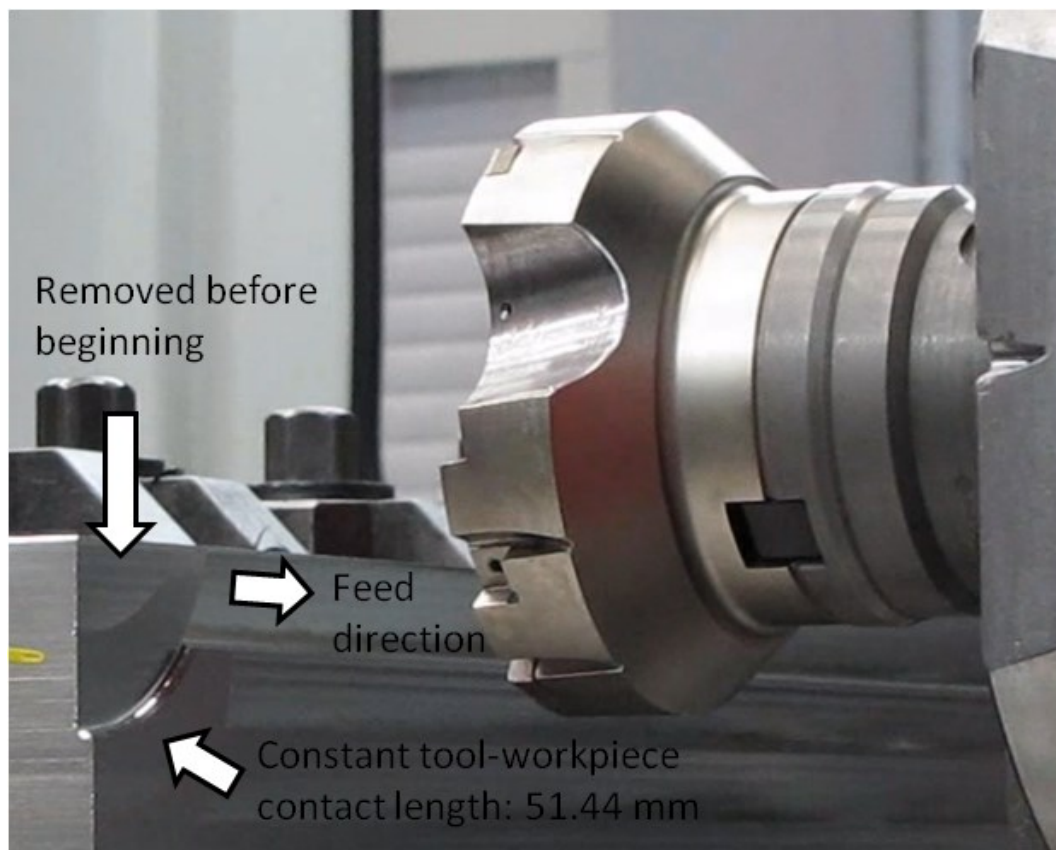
Start position of tool in test setup A. Workpiece exhibits a removed beginning of a cut segment [57].
